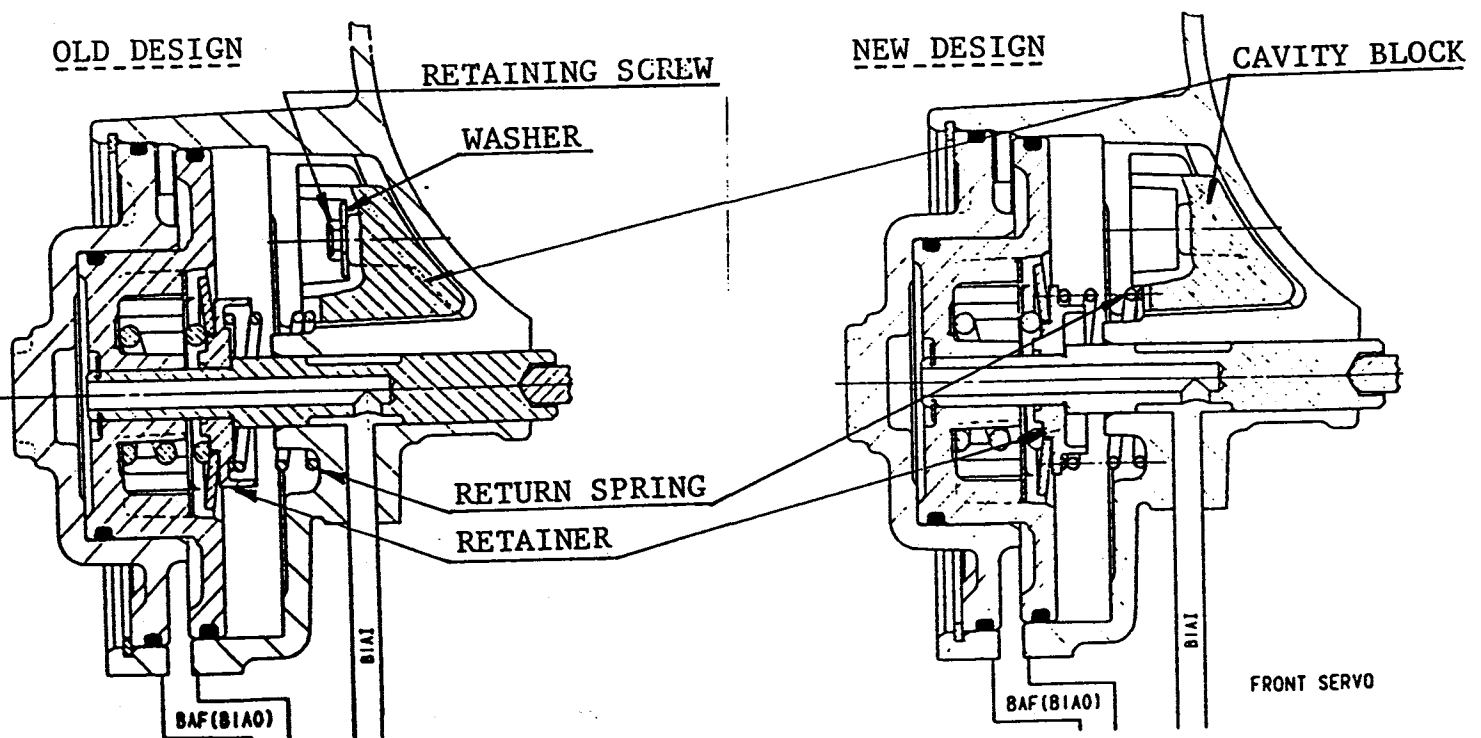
RETURN SPRING AND RETAINER ASSEMBLY
